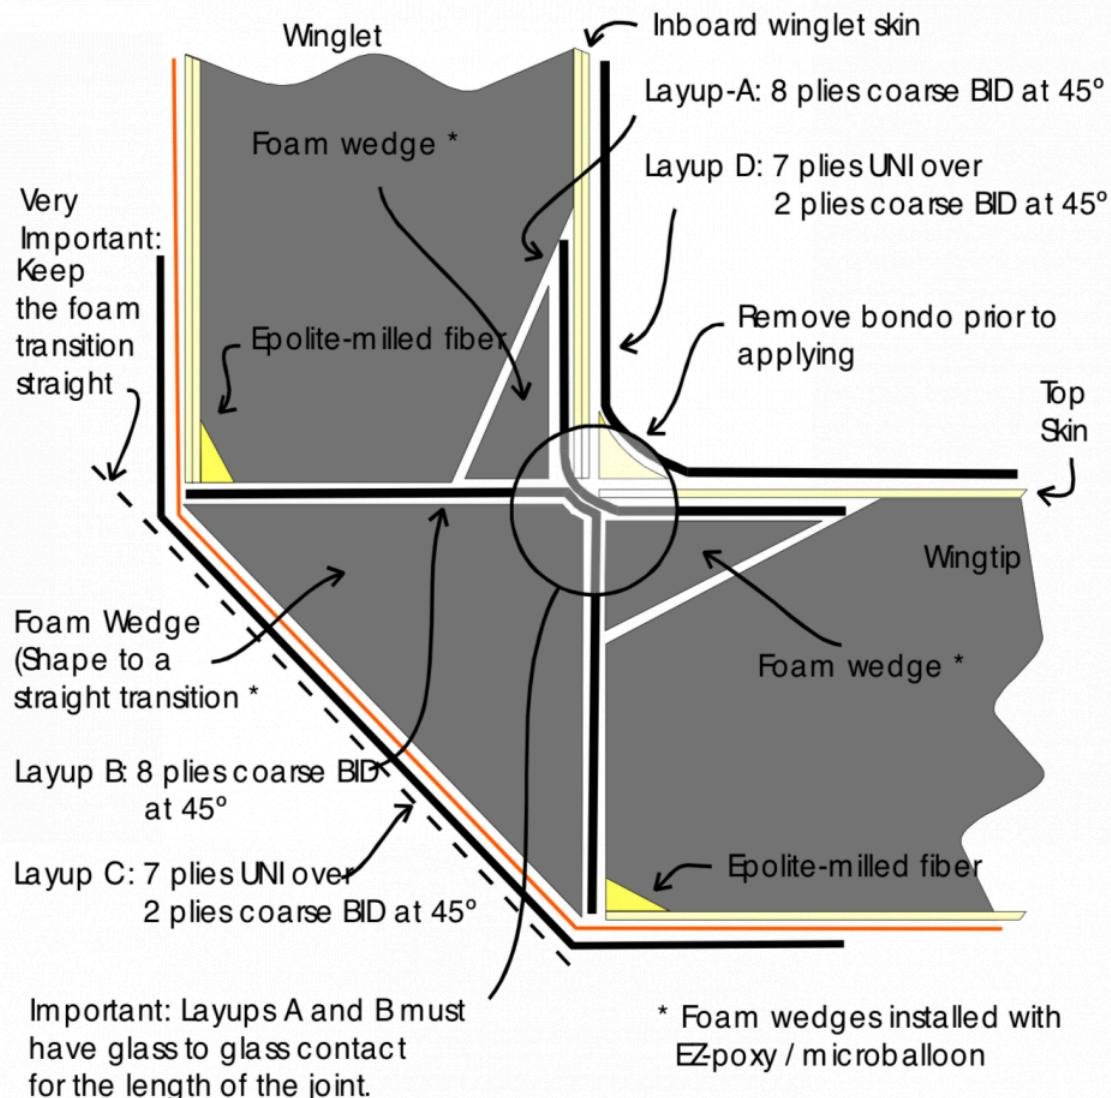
Winglet Attachment Layup Cross Section Detail
